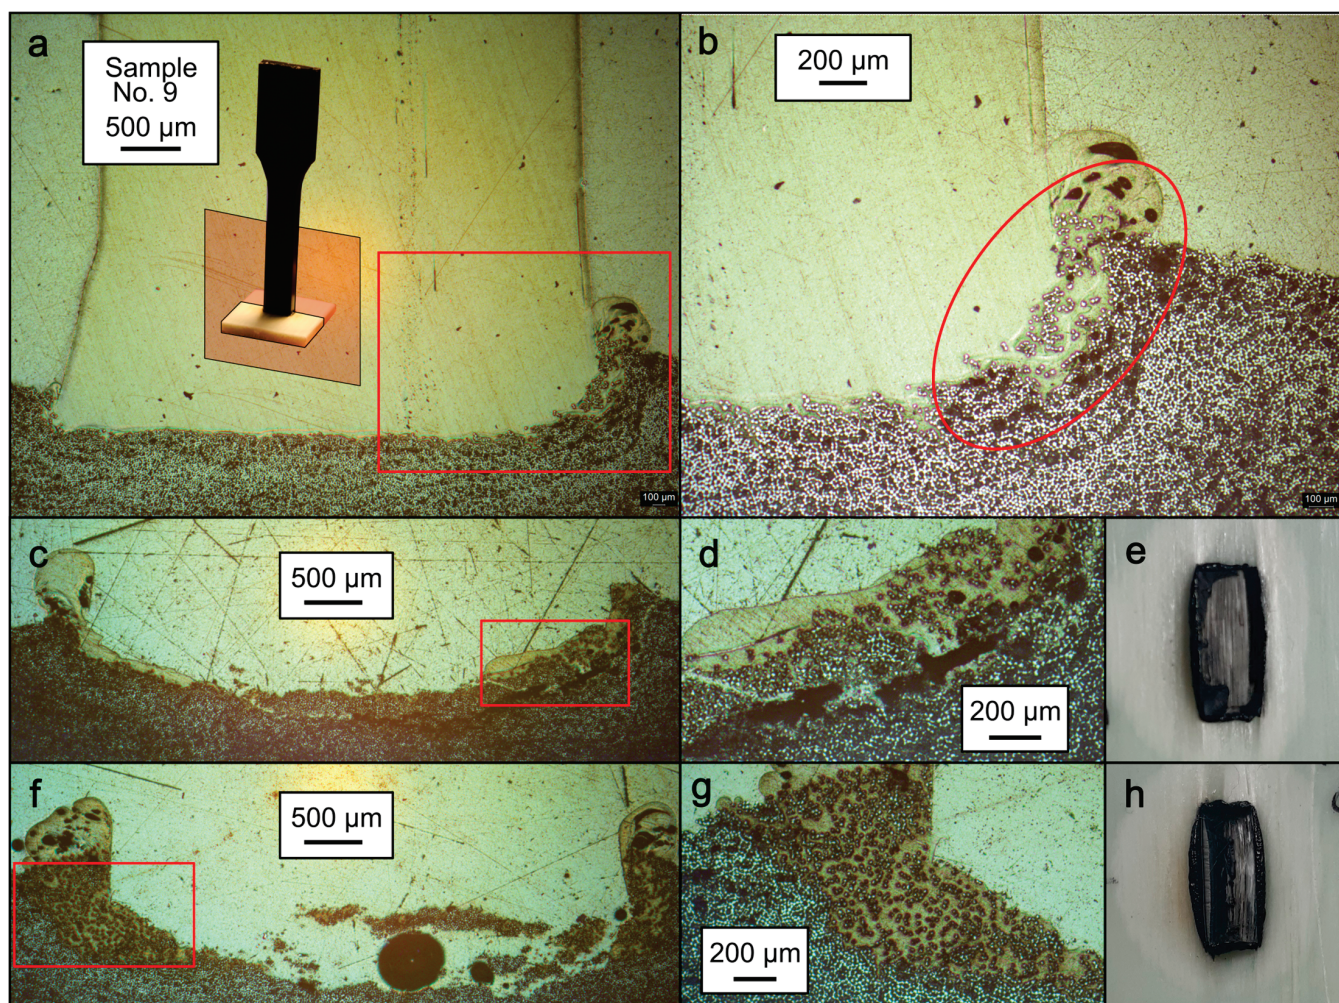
Microscopy images of the weld seam in sectional view. Test samples welded with the parameters of sample No. 9. (a,b) before applying mechanical stress, (c–e) after the tensile test, (f–h) after the bending test.
